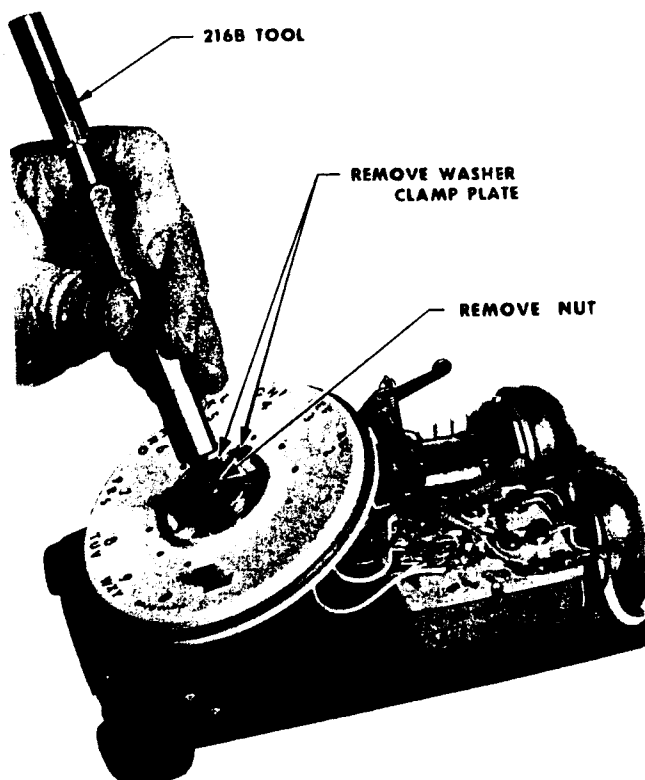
Removing Nut, Washer, and Clamp Plate
